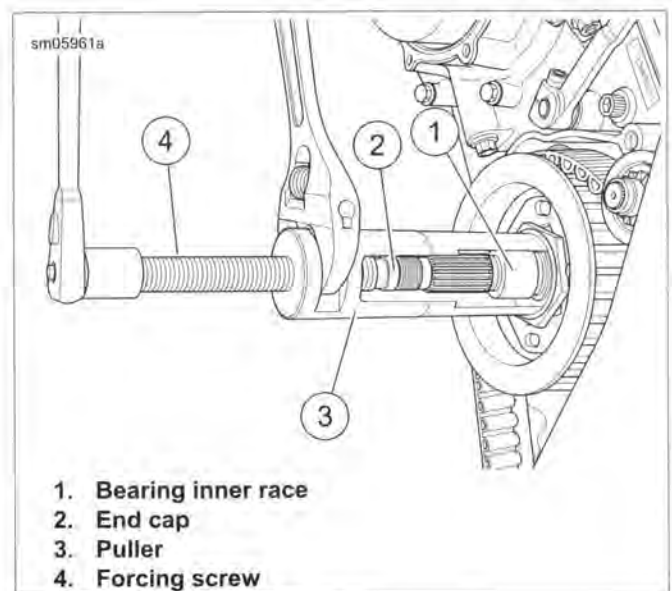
Pulling Mainshaft Inner Bearing Race
